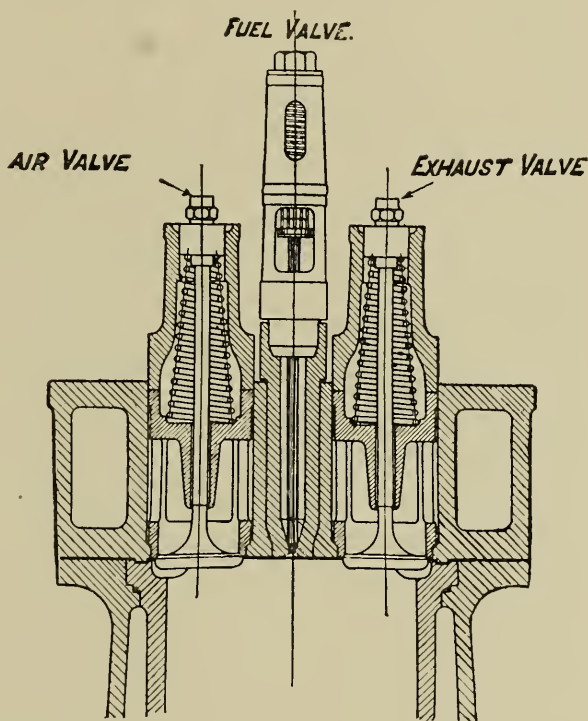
Cylinder Head and Valves of Diesel Engine.
